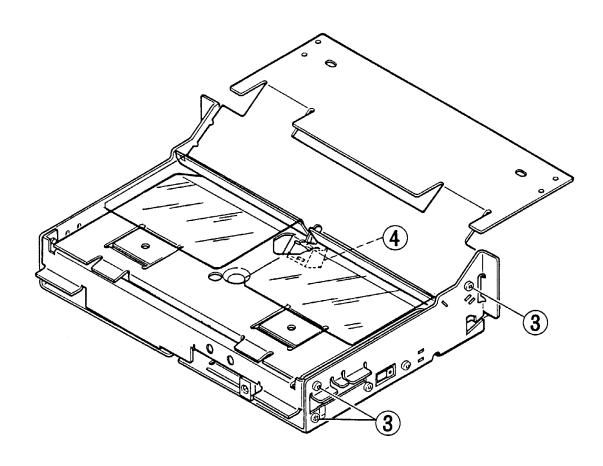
PAPER PATH SENSER REMOVAL
